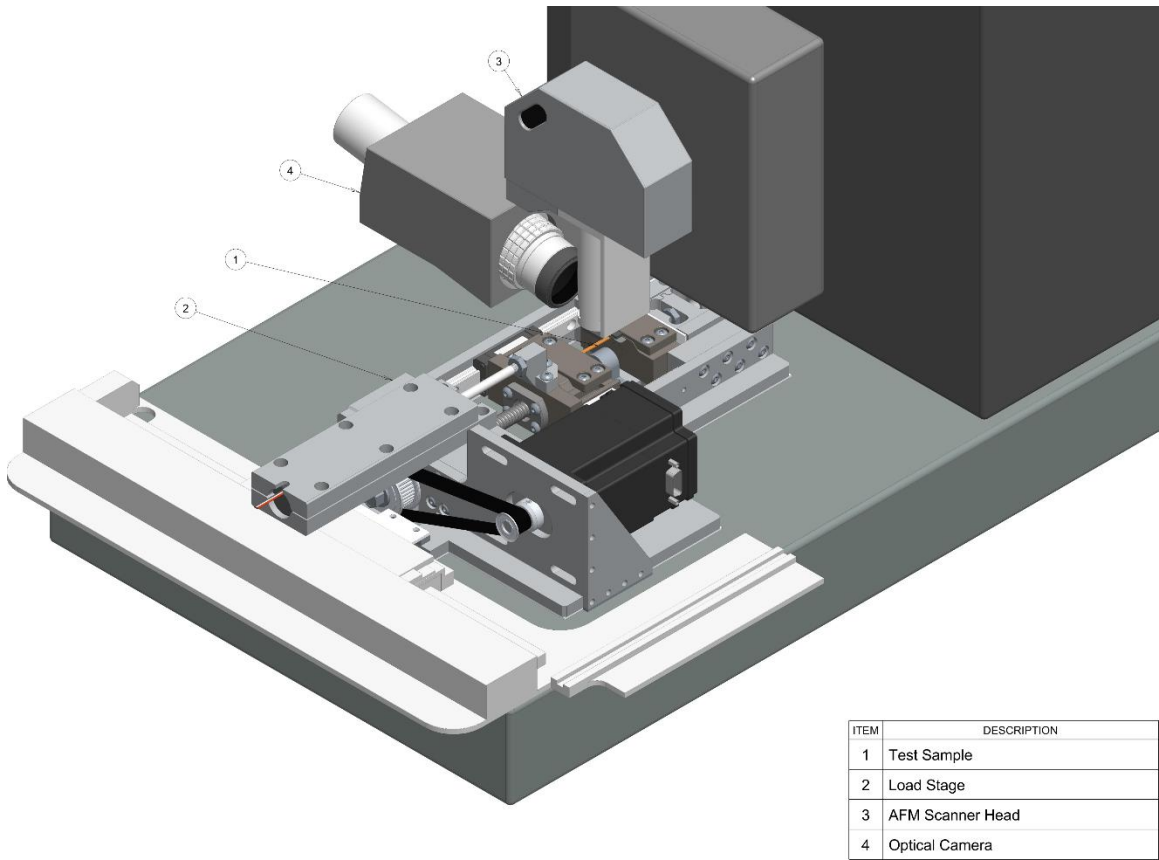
Load stage on AFM, close-up ISO view with labeled components.
